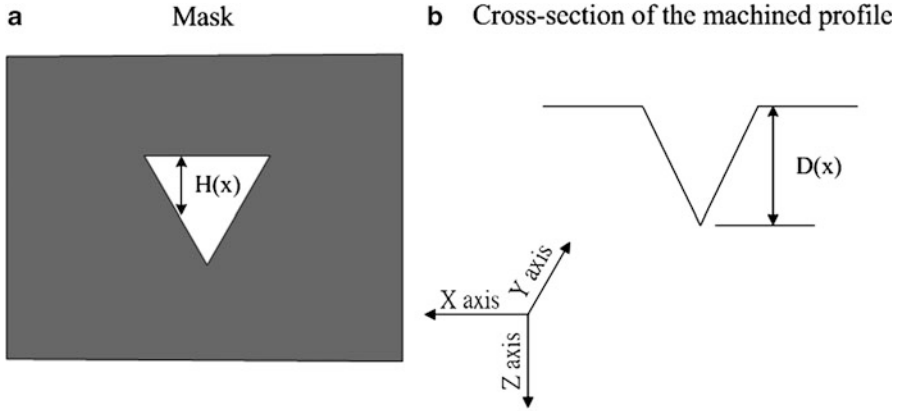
Dragging mask and machined profile (a) opening dimension of the mask pattern $H(x)$; (b) ablation depth of machined profile $D(x)$ [1], reprinted with permission
